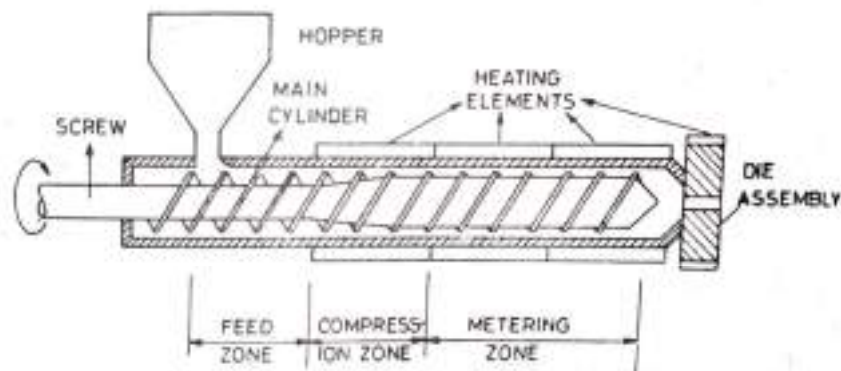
Schematic diagram of a simple extrusion machine.
